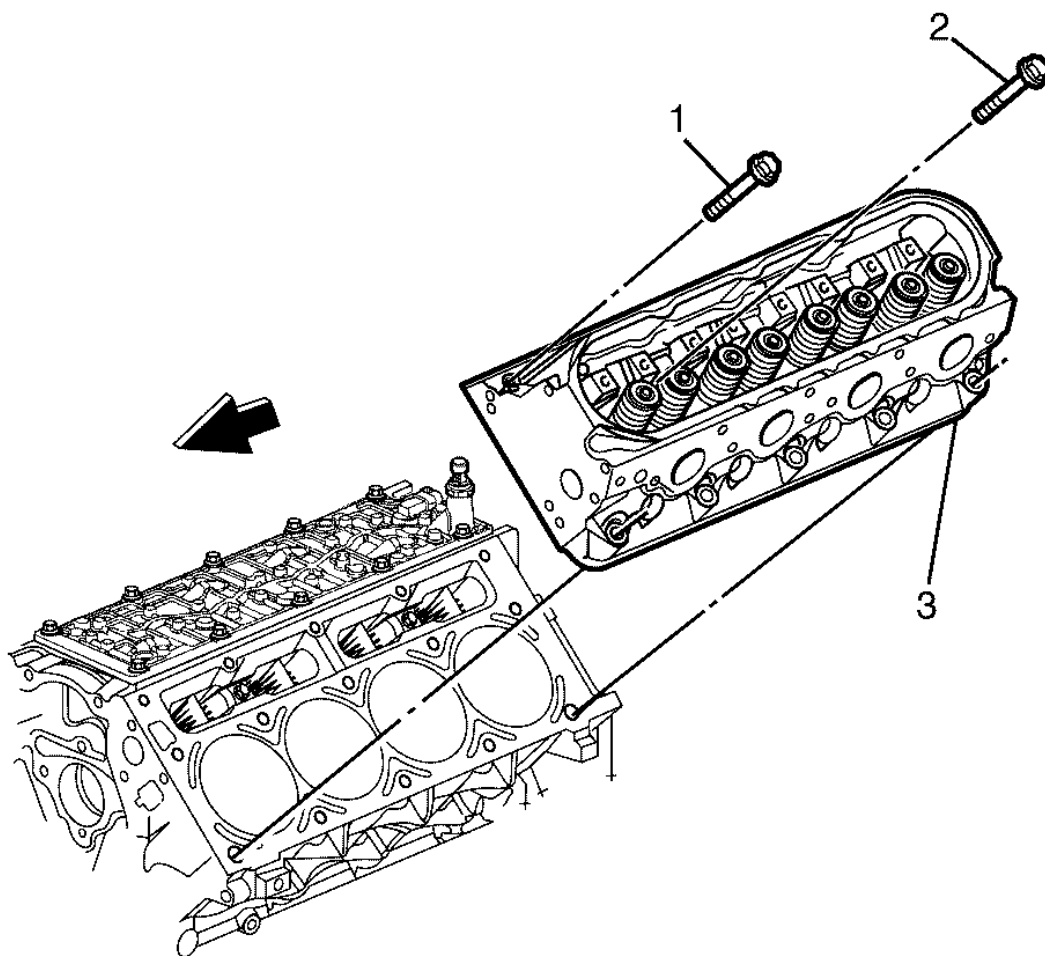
Identifying Cylinder Head & Bolts (Left Side)
